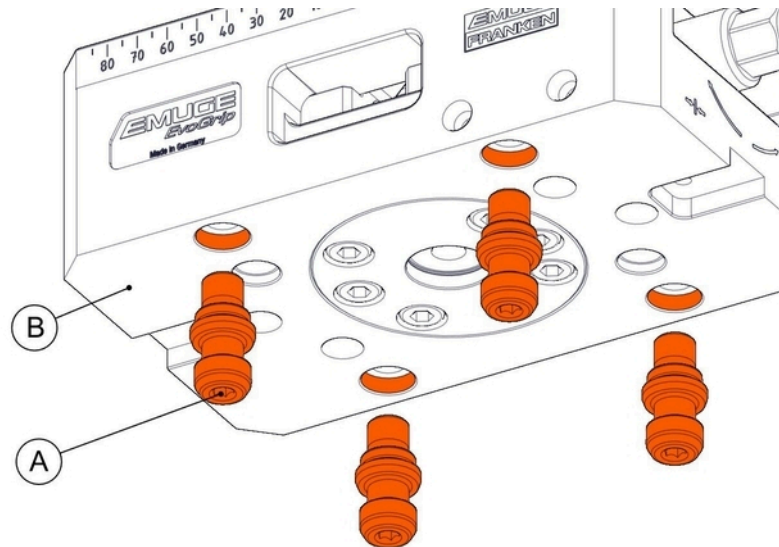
Schematic illustration: Assembly / disassembly of the locating bolts for EvoPoint zero-point system
